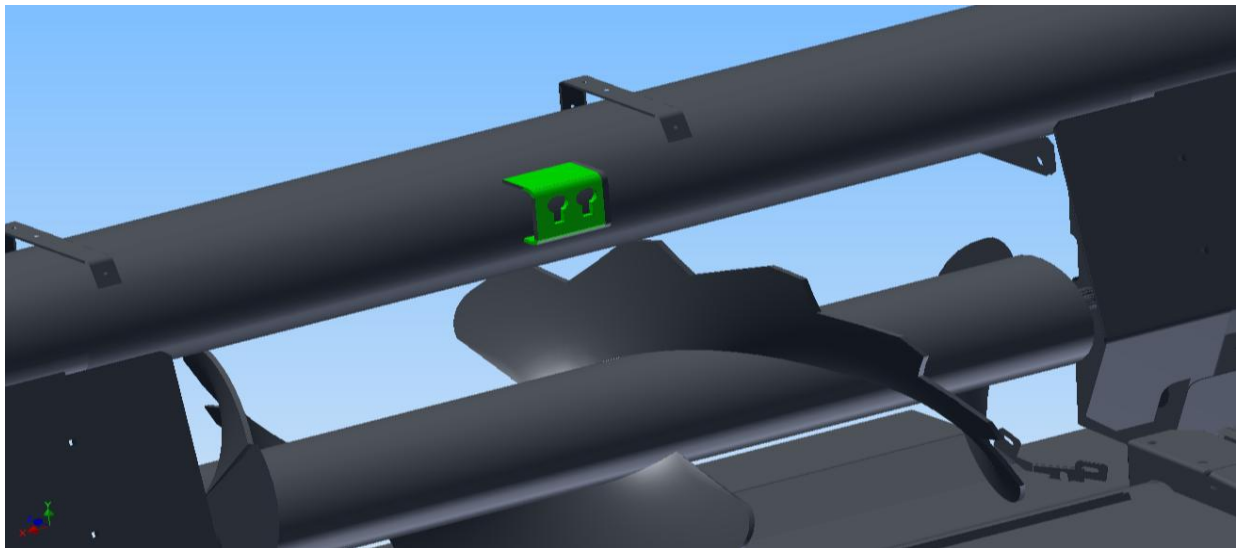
CENTER MOUNT WELDED TO FRAME (GREEN)
